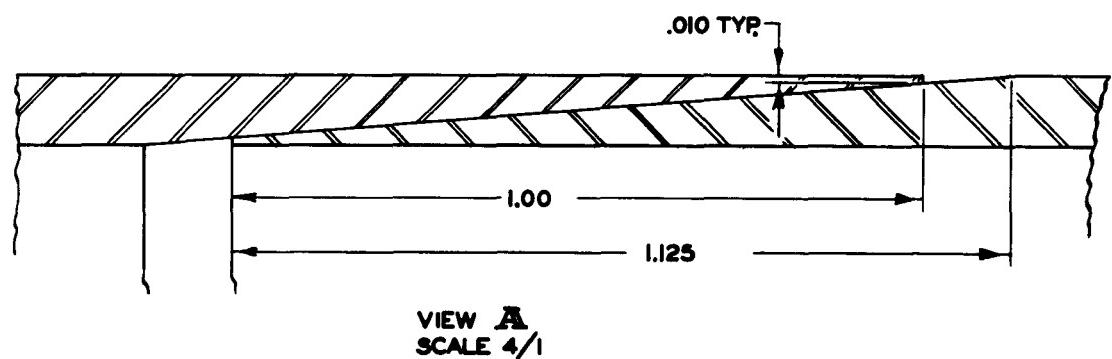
Sub-Scale Bonded Joint Test Case for Biaxial Loading
